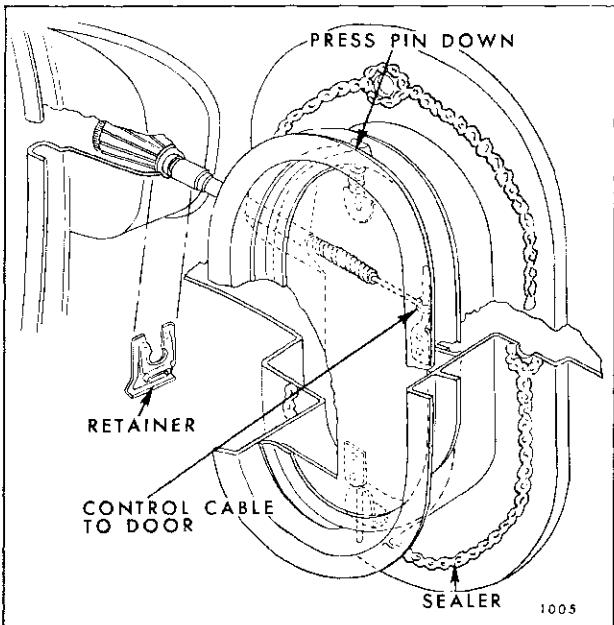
Shroud Side Finishing Panel and Air Outlet —
